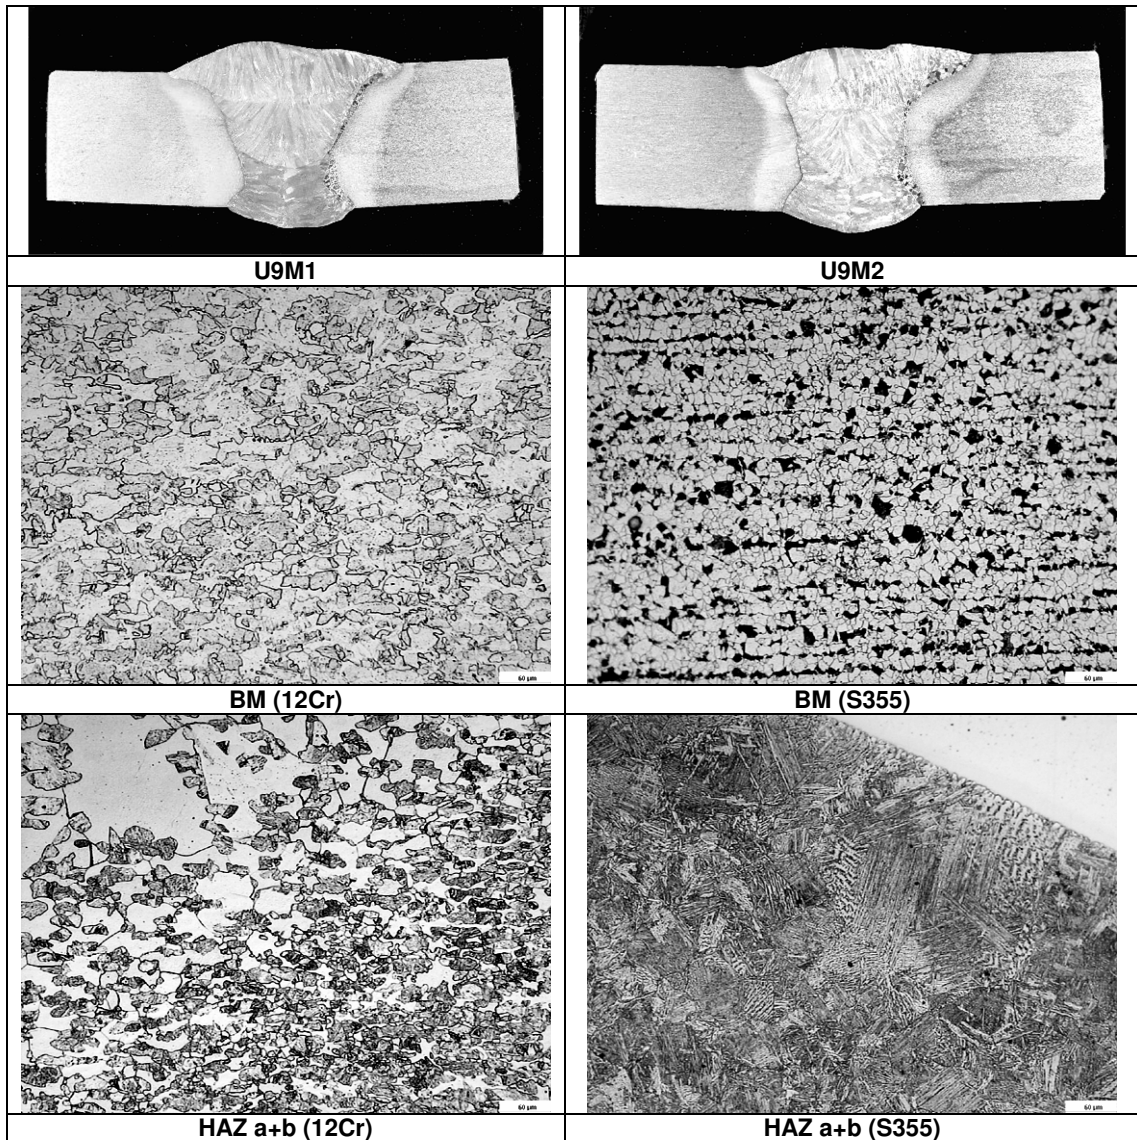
Macro and microphotographs of 12 mm thick FCAW weld with 309 filler metal (U9).
